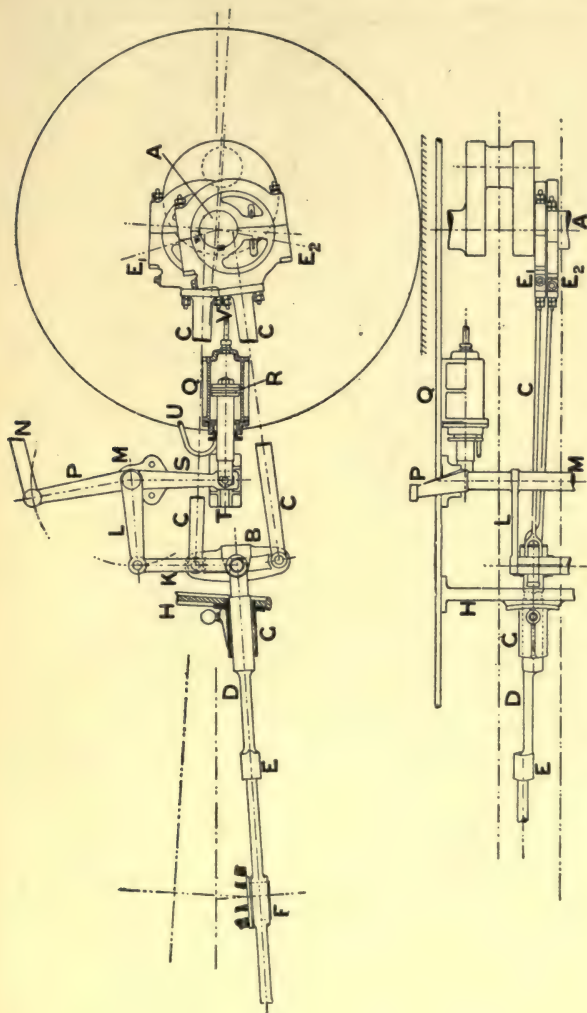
Valve gear of a Great Eastern Railway express passenger locomotive.
